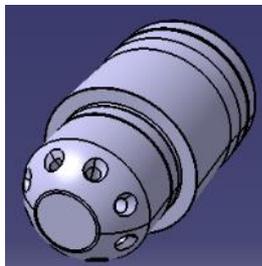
Prechamber, 8 holes, 6cm³ (9016195)
